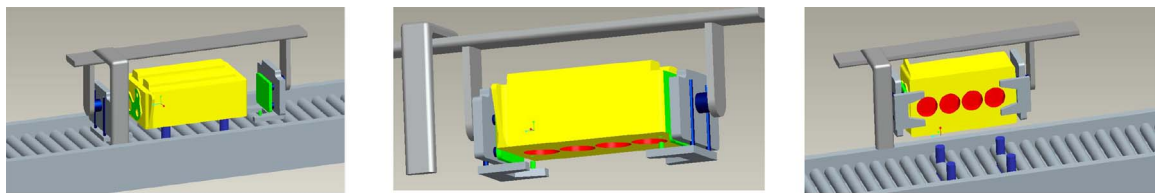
Cylinder head of B12 engine with four combustion chambers.
